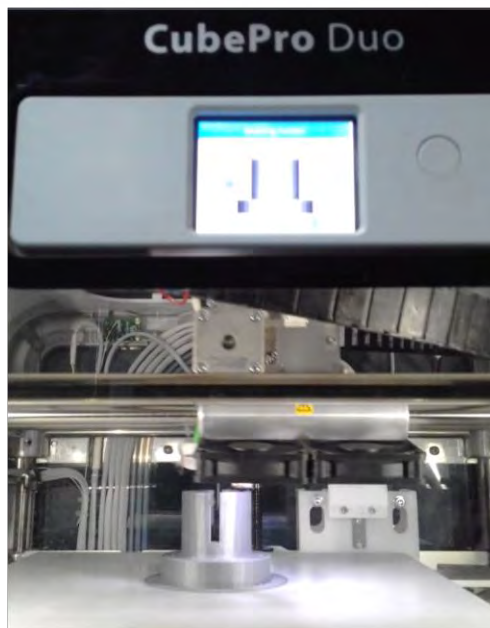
Bearing holder part printed using CubePro Duo 3D printer.
